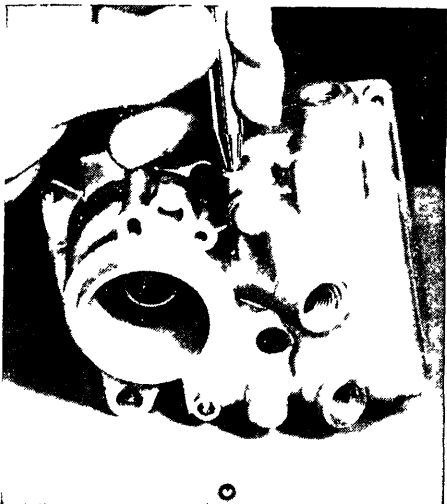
Assemble lead ball plugs and taper drive plugs, using ball set tool
